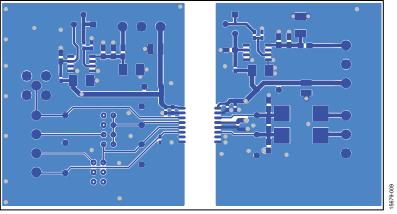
EVAL-ADM2795EEPBZ Evaluation Board Top Layer
